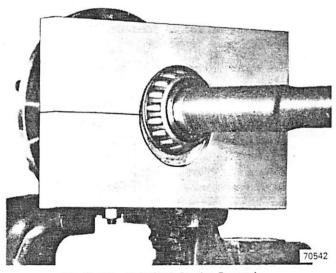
F-26 Axle Shaft Bearing Removal— Cherokee-Wagoneer-J-10 Truck Axle
